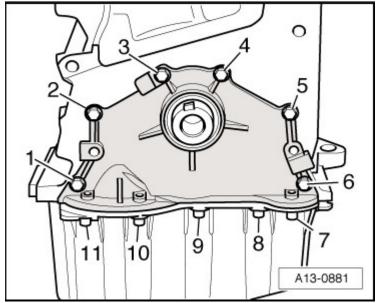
Identifying Sealing Flange Bolts Courtesy of AUDI OF AMERICA, LLC
